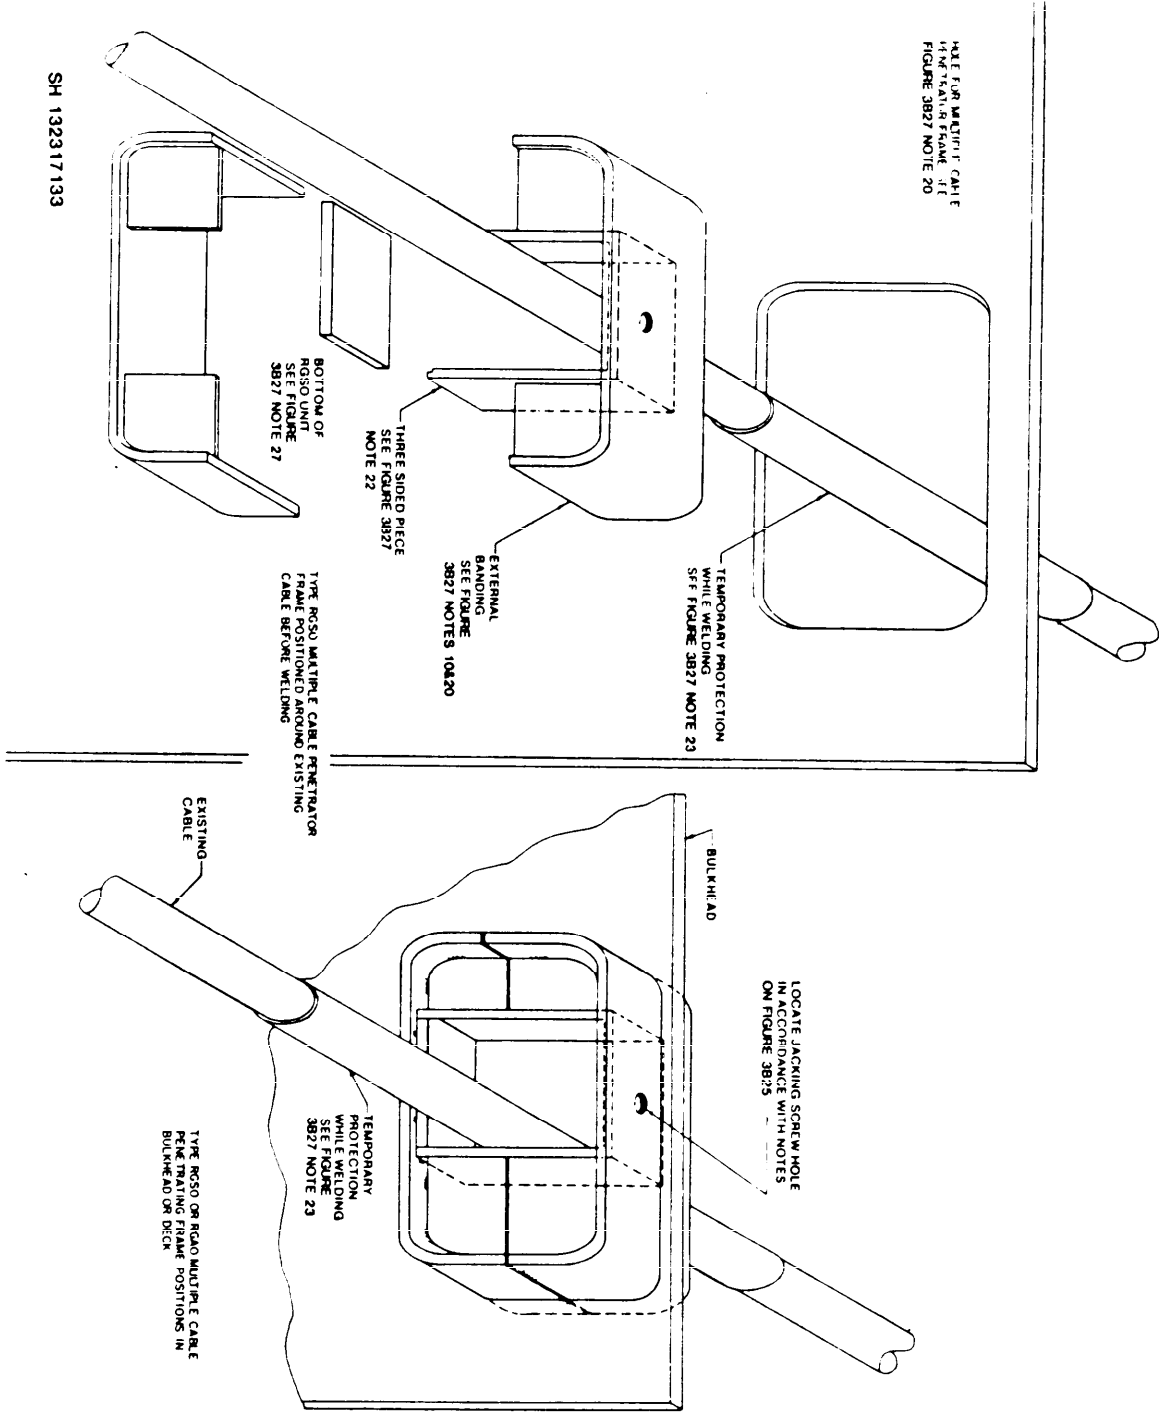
Multiple cable penetrator installation details (type RGS and RGA)
